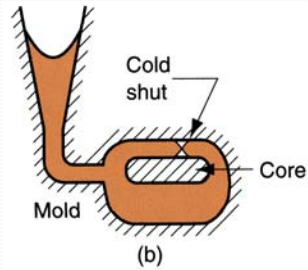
Some common defects in castings: (b) cold shut
